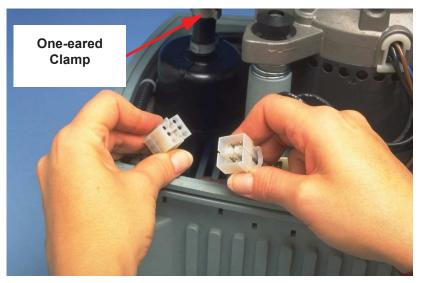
FIGURE AL: DISCONNECTING THE COMPRESSOR ASSEMBLY WIRING HARNESS AND LOCATION OF THE ONE-EARED CLAMP
